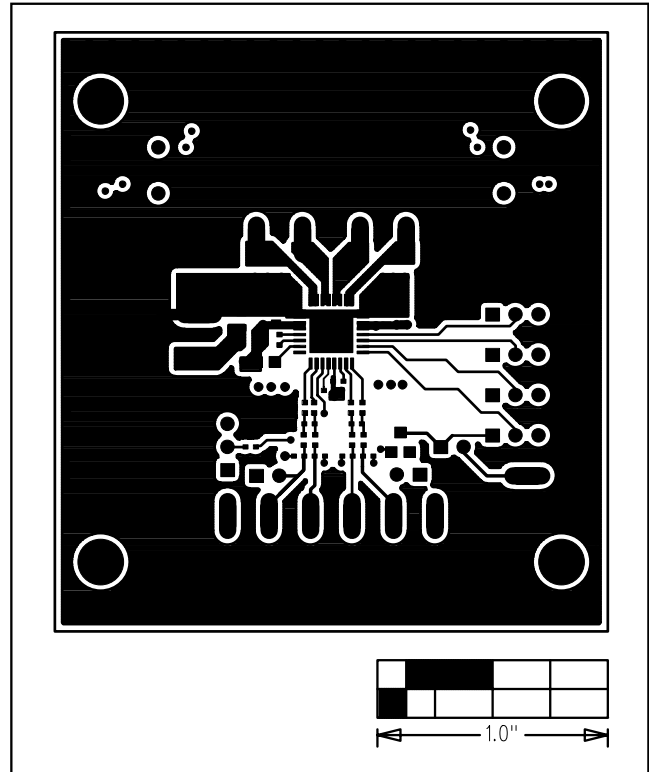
MAX9714 EV Kit PC Board Layout—Component Side
